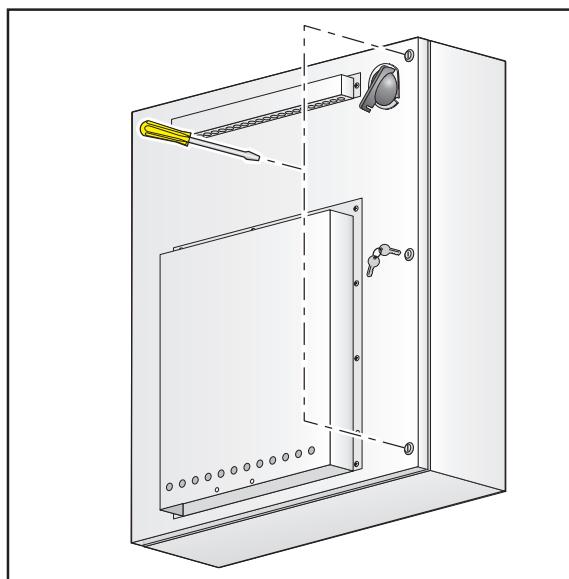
Unscrew the three screws to open the cabinet door. (Newer control cabinets require a key)
